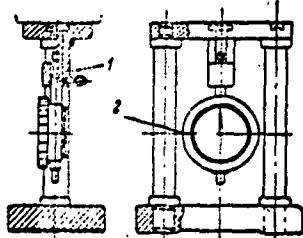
Device for testing the axial free play. 1) Frame; 2) indicator.
